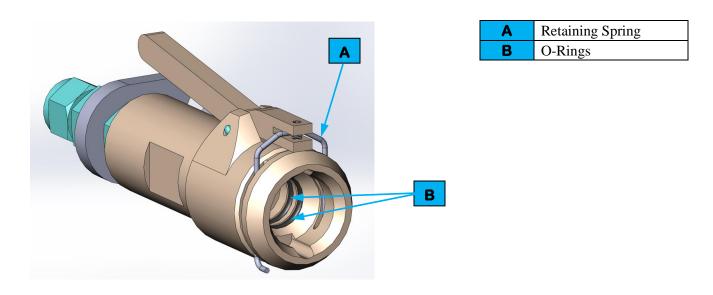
BEV3 Outlet Coolant Connector O-Rings and Retaining Spring
